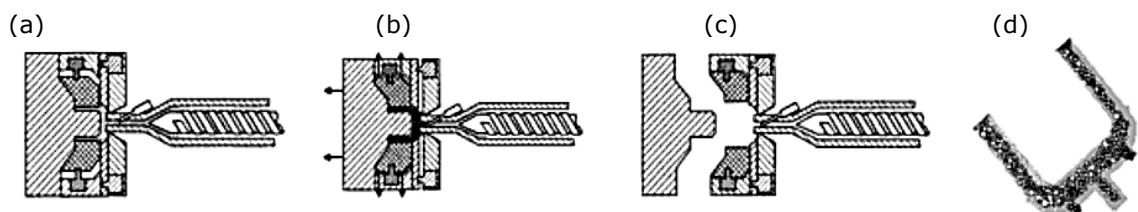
mould filling process during injection moulding process. (a) injection of the polymer melt and BA in the mould by extrusion until designed volume is filled. (b) mould enlargement and starting of foaming process, (c) mould release and (d) final foamed part produced. Adapted from ((Pötsch and Michaeli, 2008)).
